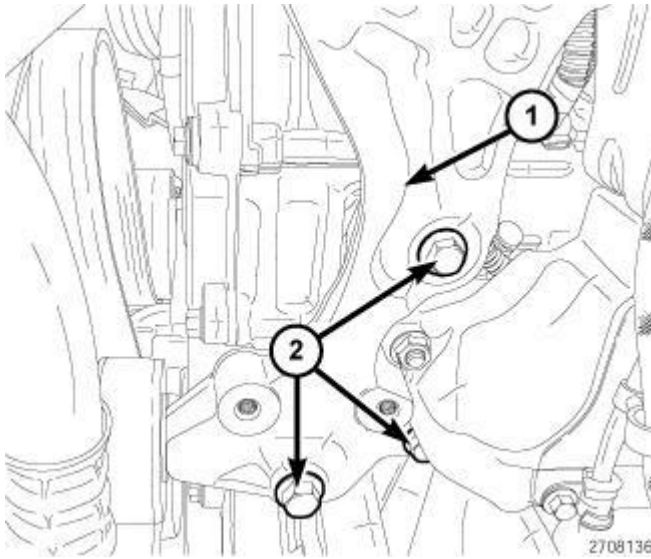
GENERATOR MOUNTING BRACKET & BOLTS
